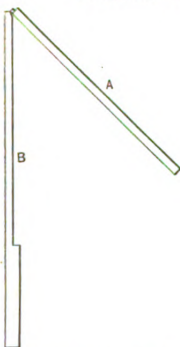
Hinged Board Used in Forming Inclined Top of Writing Desk, as Shown in Fig. 2.
